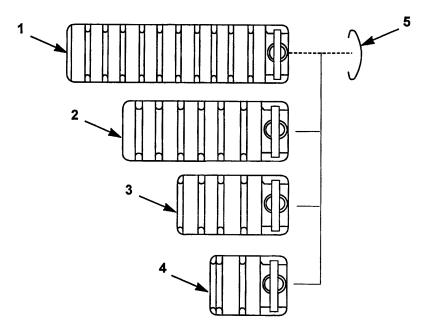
(M4 and M4A1) M4 Rail Adapter Cover Assemblies, 12973132, 12973135, 12973137, 12973138.
